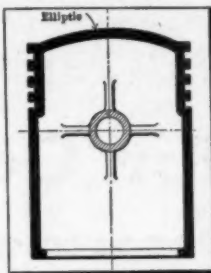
Section of a piston with a slightly elliptical head which is in common use in motors
